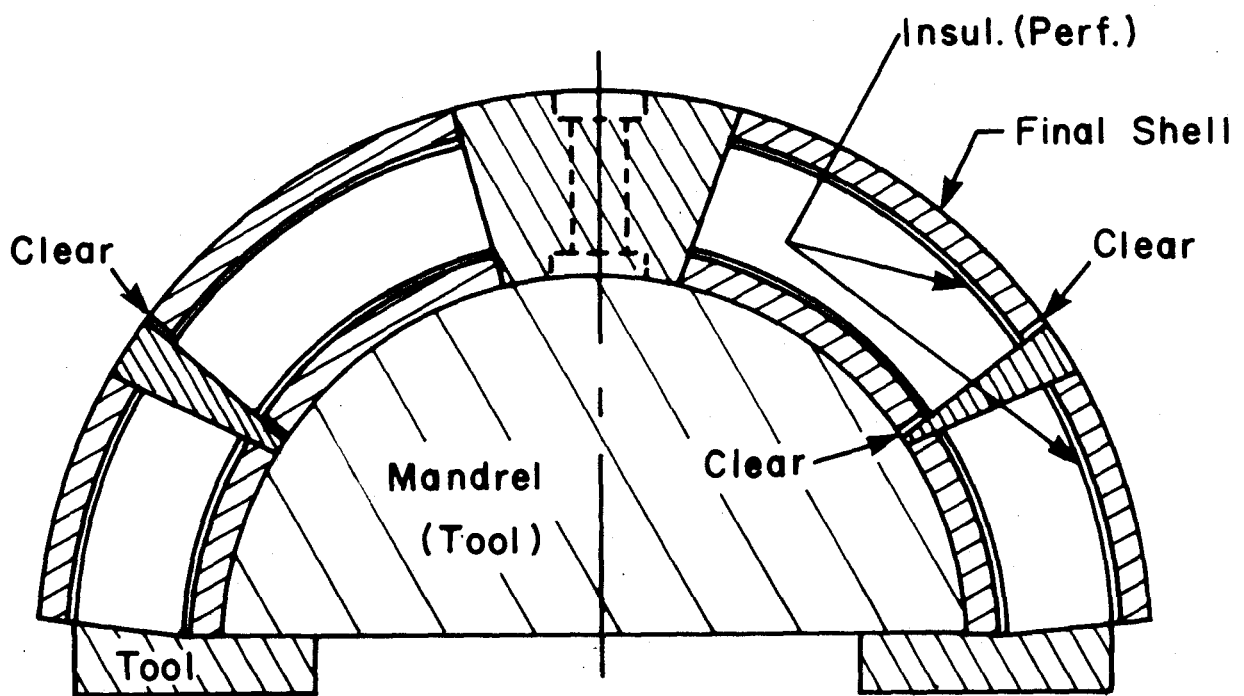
Coil Half Inverted, Outer (Female) Winding Fixture Removed, Insulation and Outer Shells Installed
